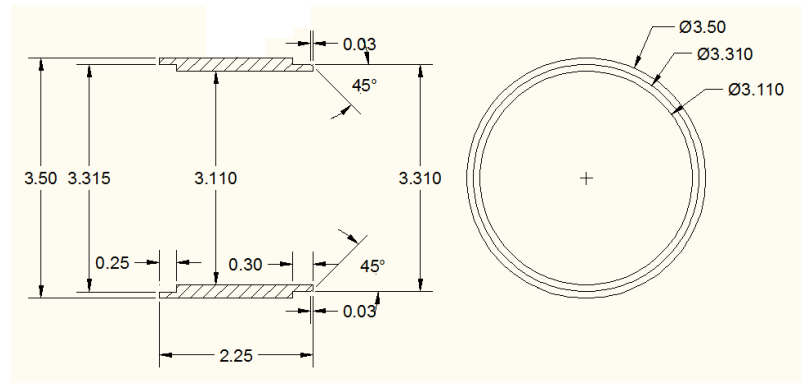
Foam body mold part B: 2.25 in extension (dimensions in inches, material: stainless steel)
